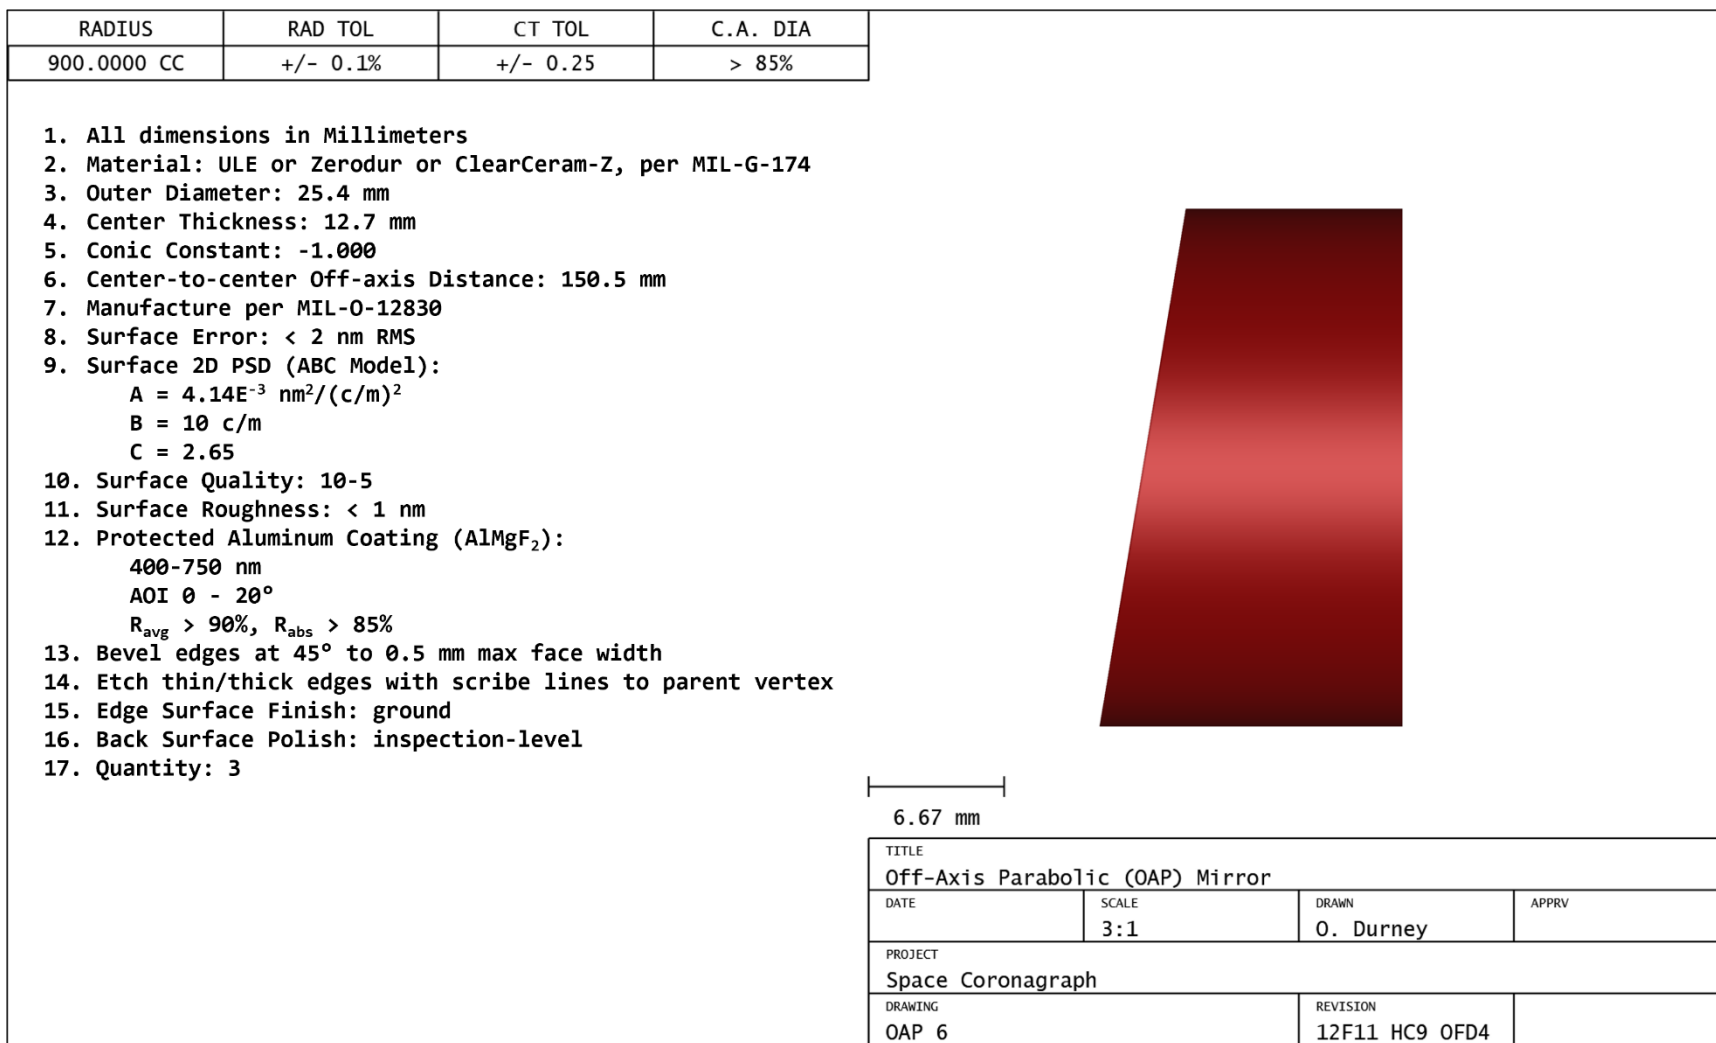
Off-axis parabolic (OAP) mirror 6 drawing
